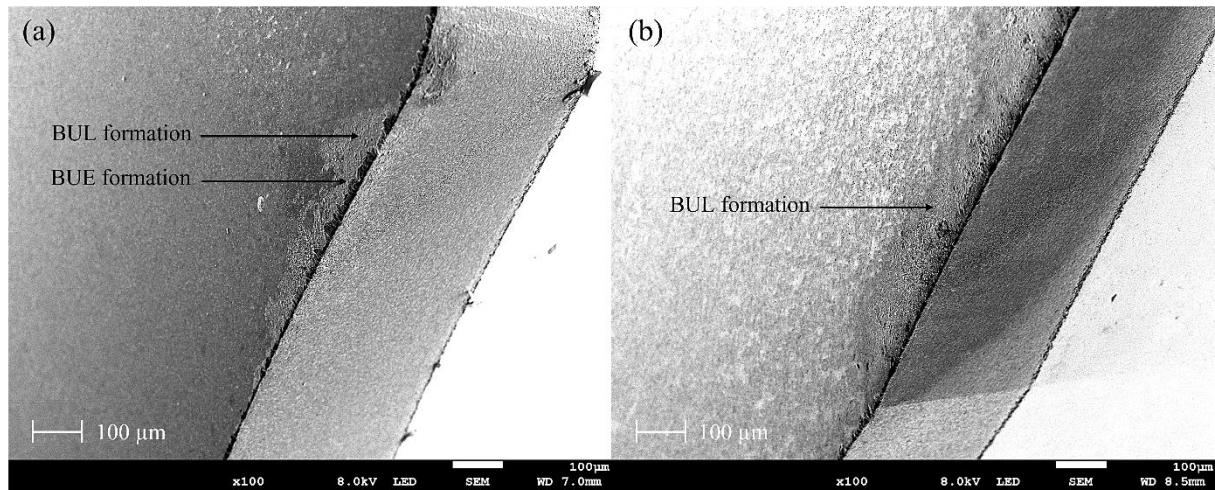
Examples of adhered aluminum onto PCD diamond cutting tools. (a) BUL and BUE formation after machining 6082-grade aluminum. BUL formation after machining Alumelec 89.
